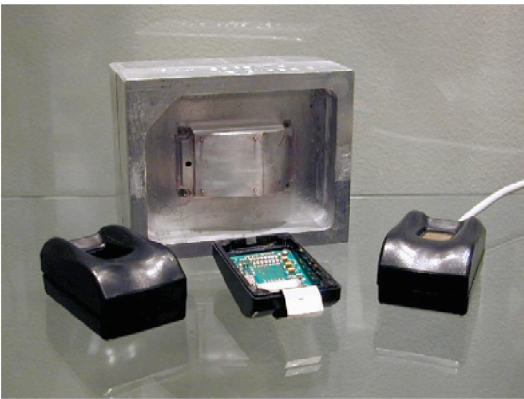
MACHINED MOLD FOR PLASTIC PARTS.
